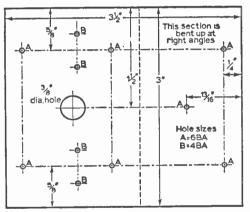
(left), b (right): Drilling dimensions for the two aluminium mounting brackets.
